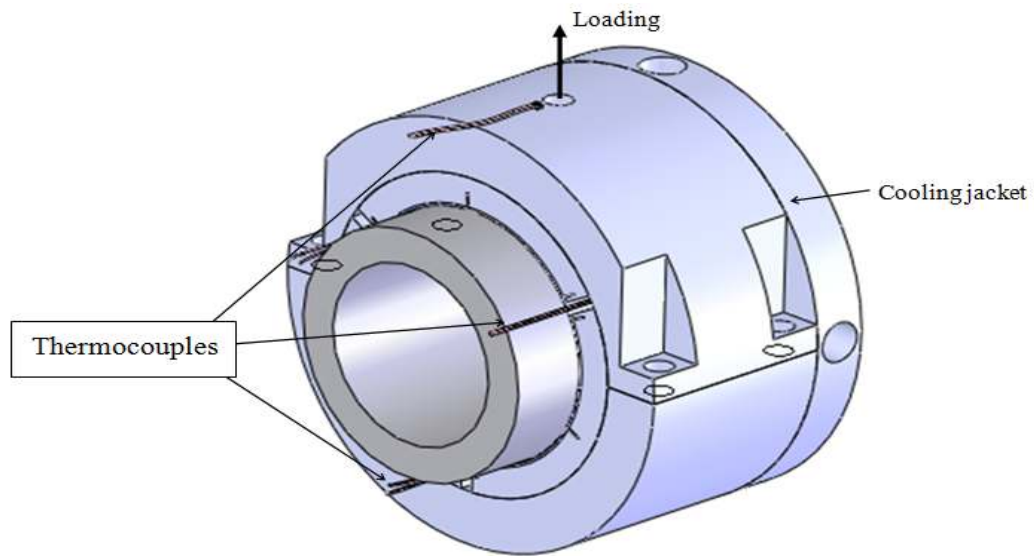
Test section and bearing with cooling jacket and thermocouples attached
